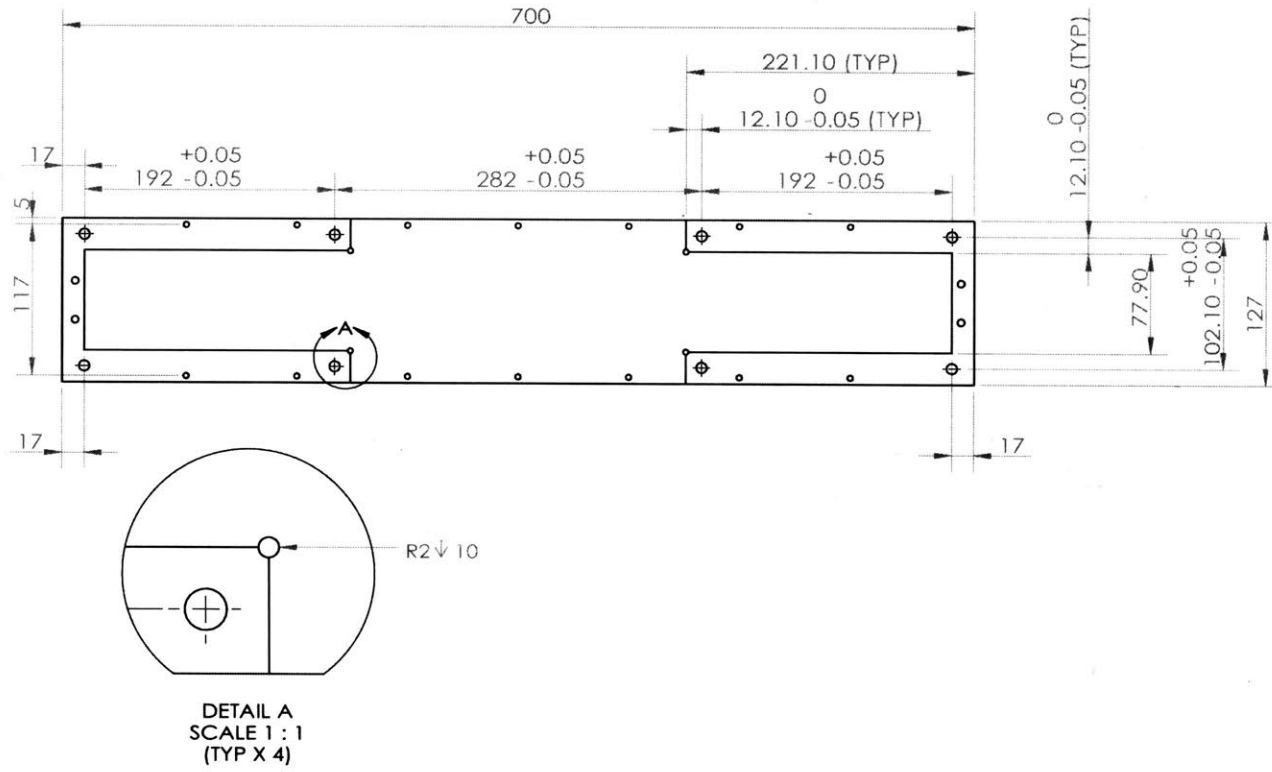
Drawing of the mounting plate for our new fine-tooth motor, also serving as the dynamometer upper plate. Page 1 of 4.
